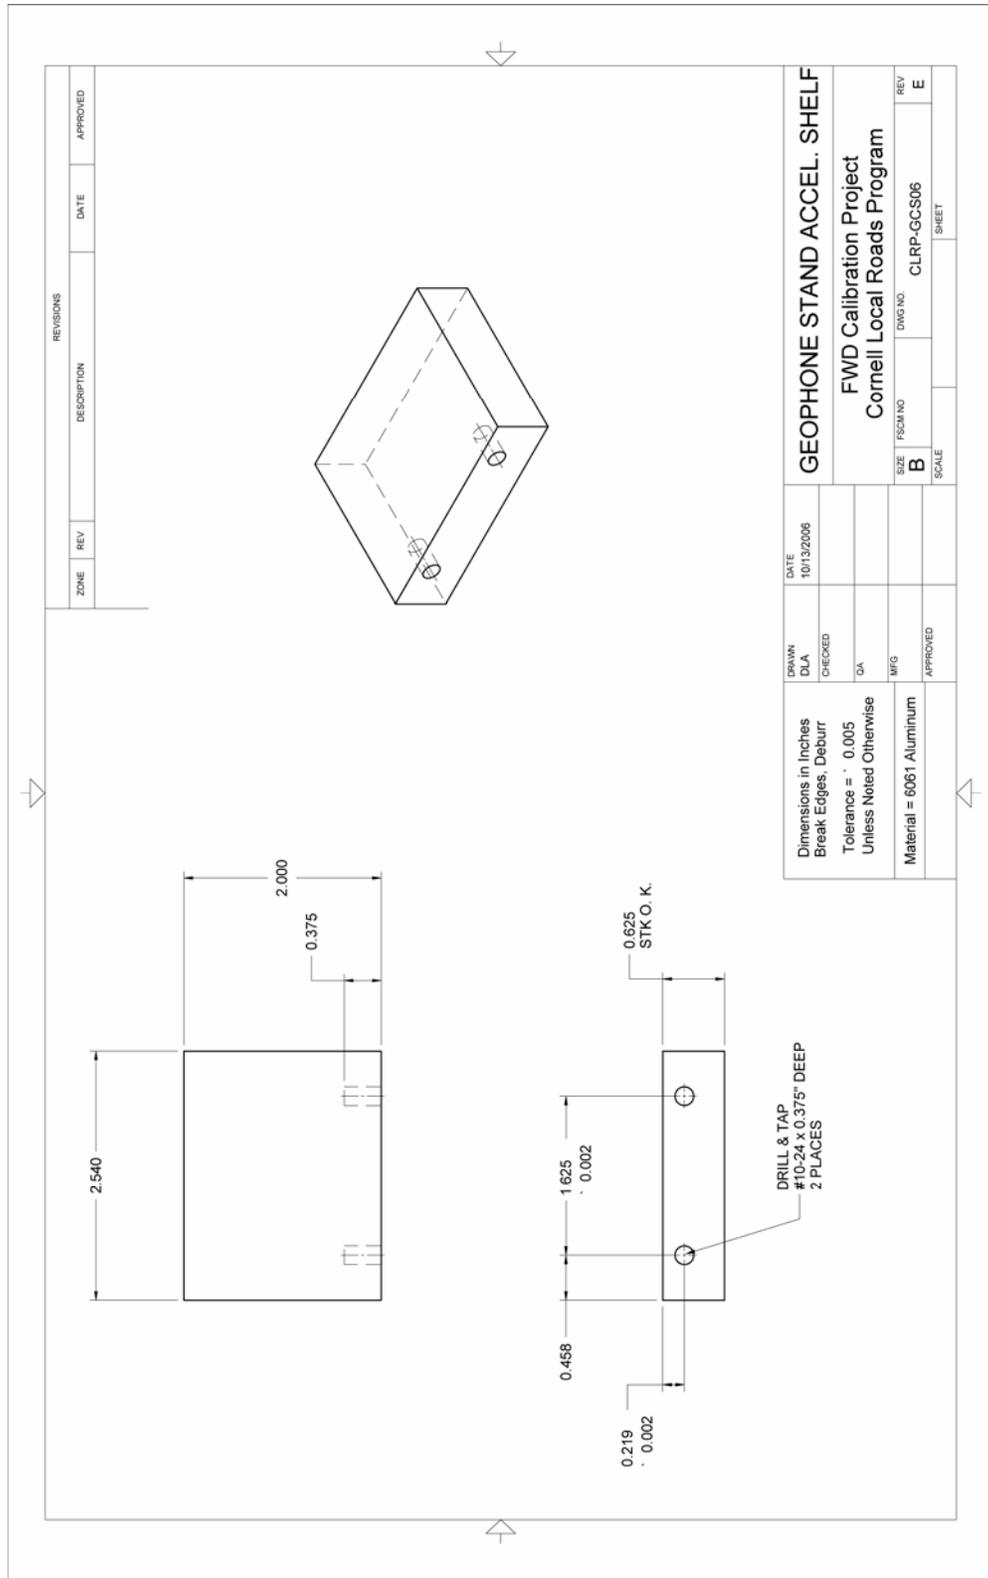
Drawing. CLRP-GCS06 Geophone Stand Accelerometer Shelf.
